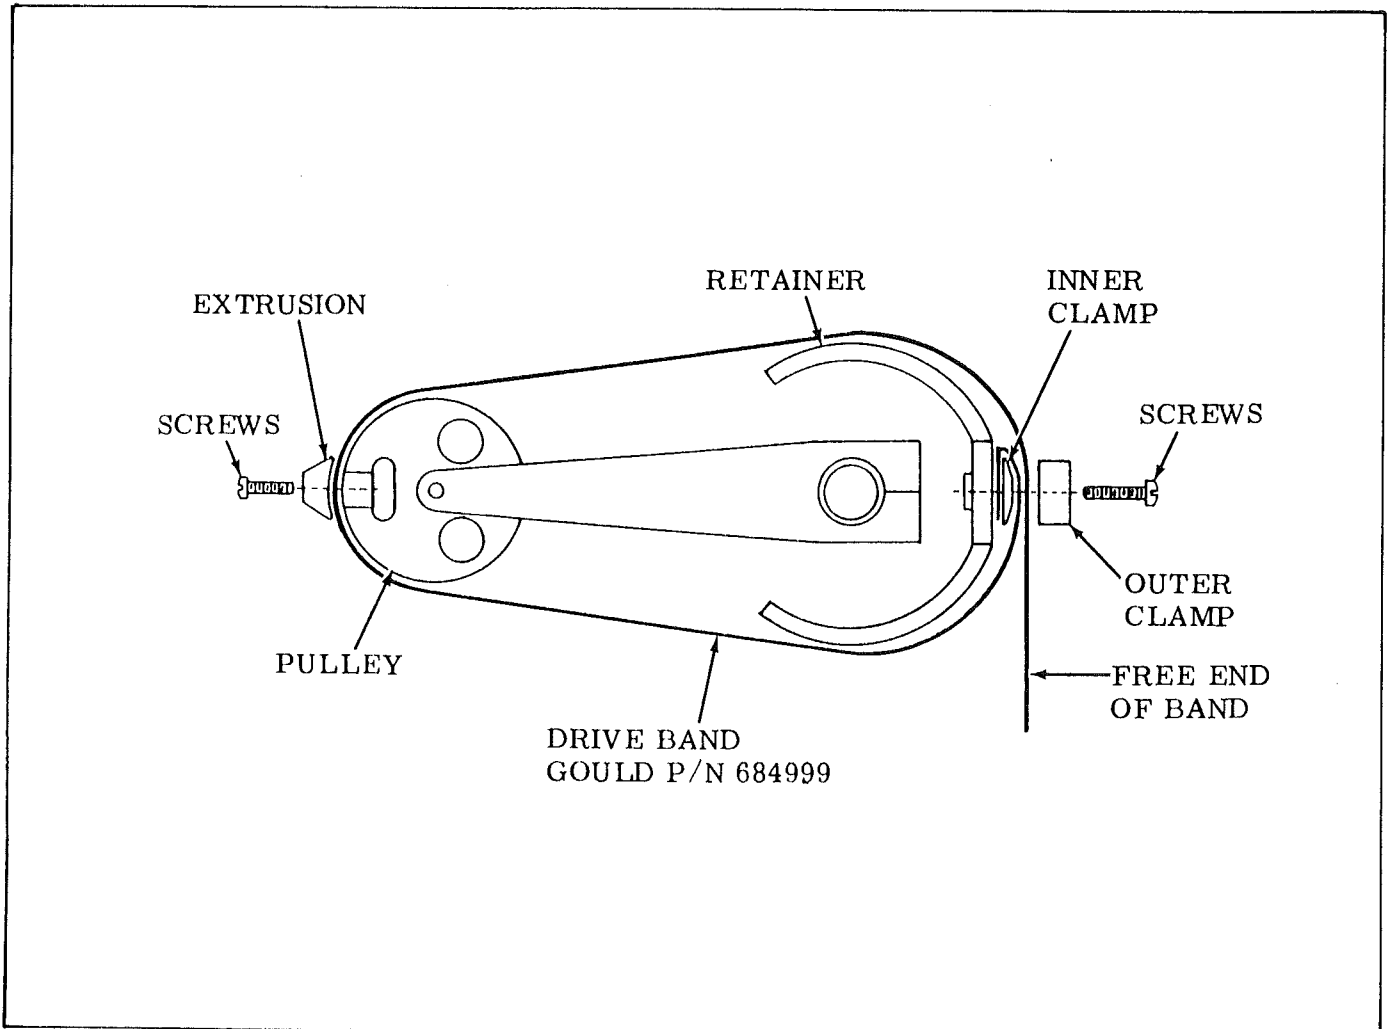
PENMOTOR DRIVE BAND REPLACEMENT
